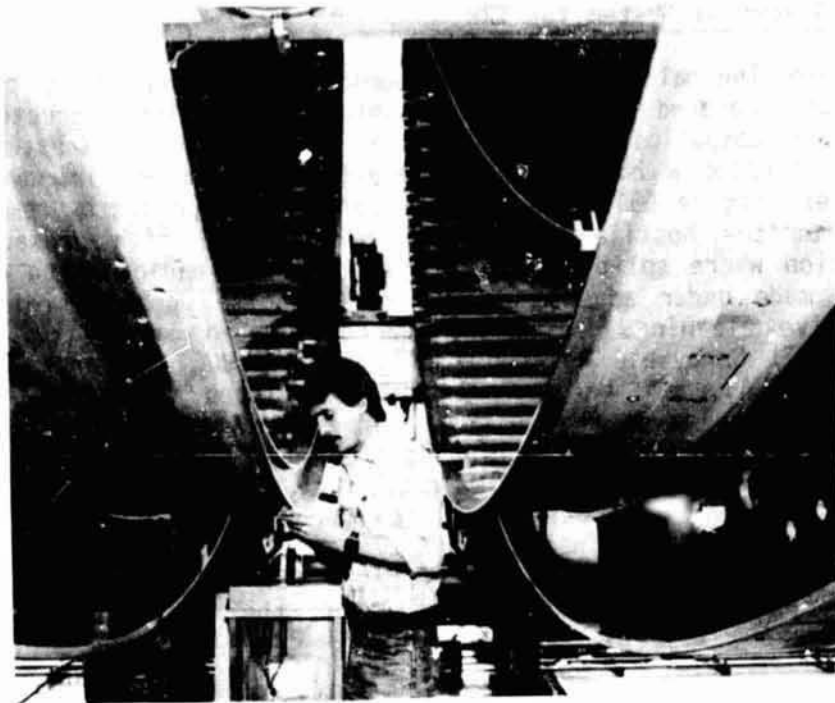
Pre-Installation Inspection of ET Barrel Assembly Tooling Aids.
